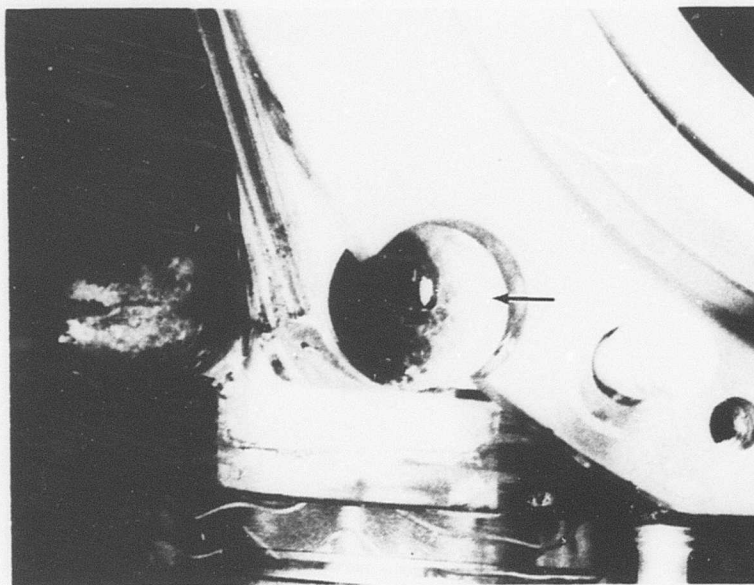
Leak in Oil Transfer Tube Bore After Sealing With Fluorinated Silicone.
